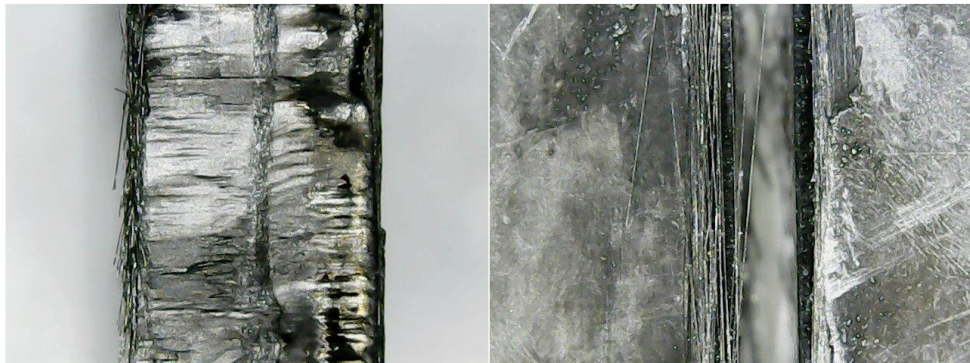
Microscope images of edge side (left) and top side (right) of laser cutting test 64.
